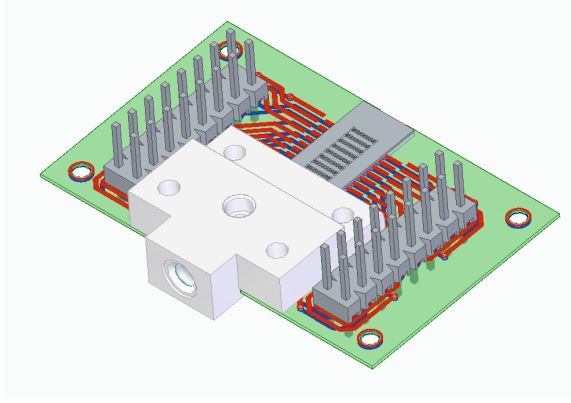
CAD assembly of the VLM thruster with nozzle configuration. Flow direction is from the bottom-left towards top-right
